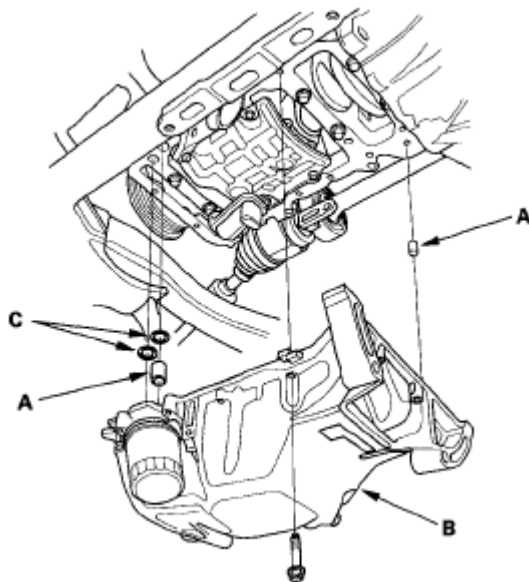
Identifying Dowel Pins, Oil Pan And O-Rings
